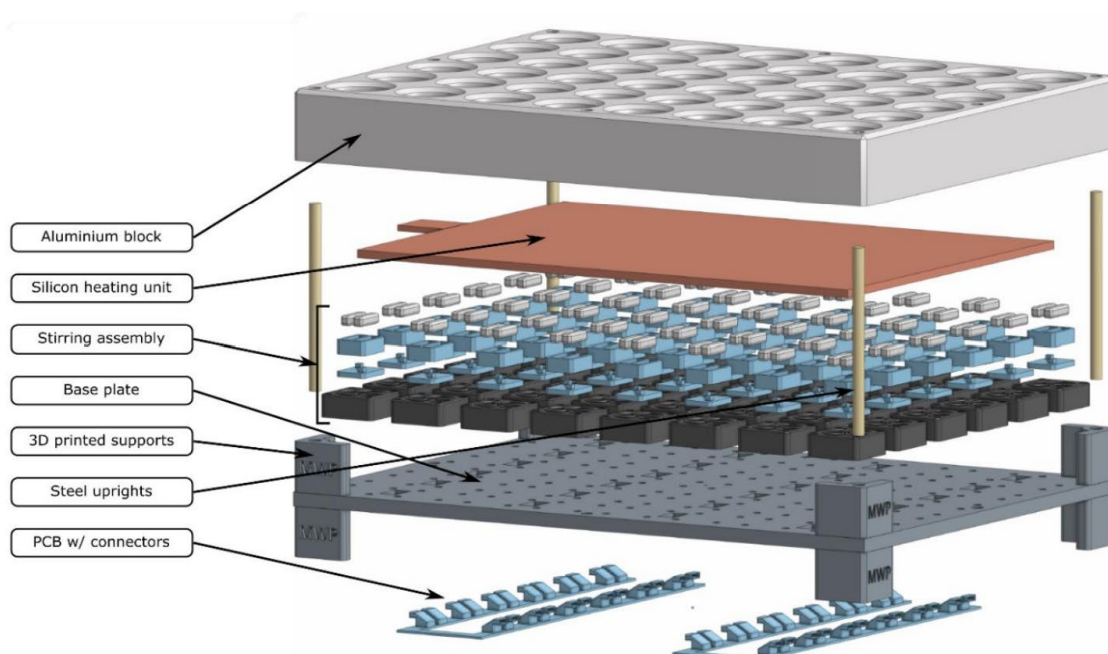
Exploded view of the vial heater. Reproduced from Salley et al.⁷
